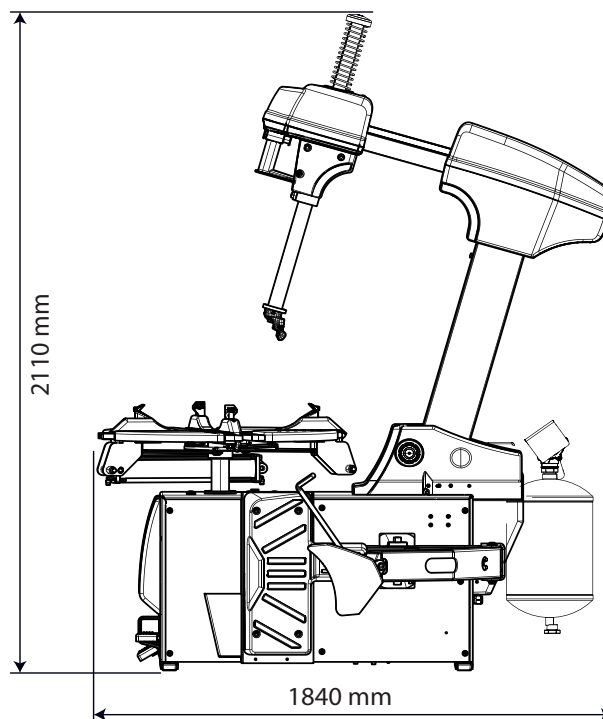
Dimensions - side view of FALCO EVO 622/622 IT
